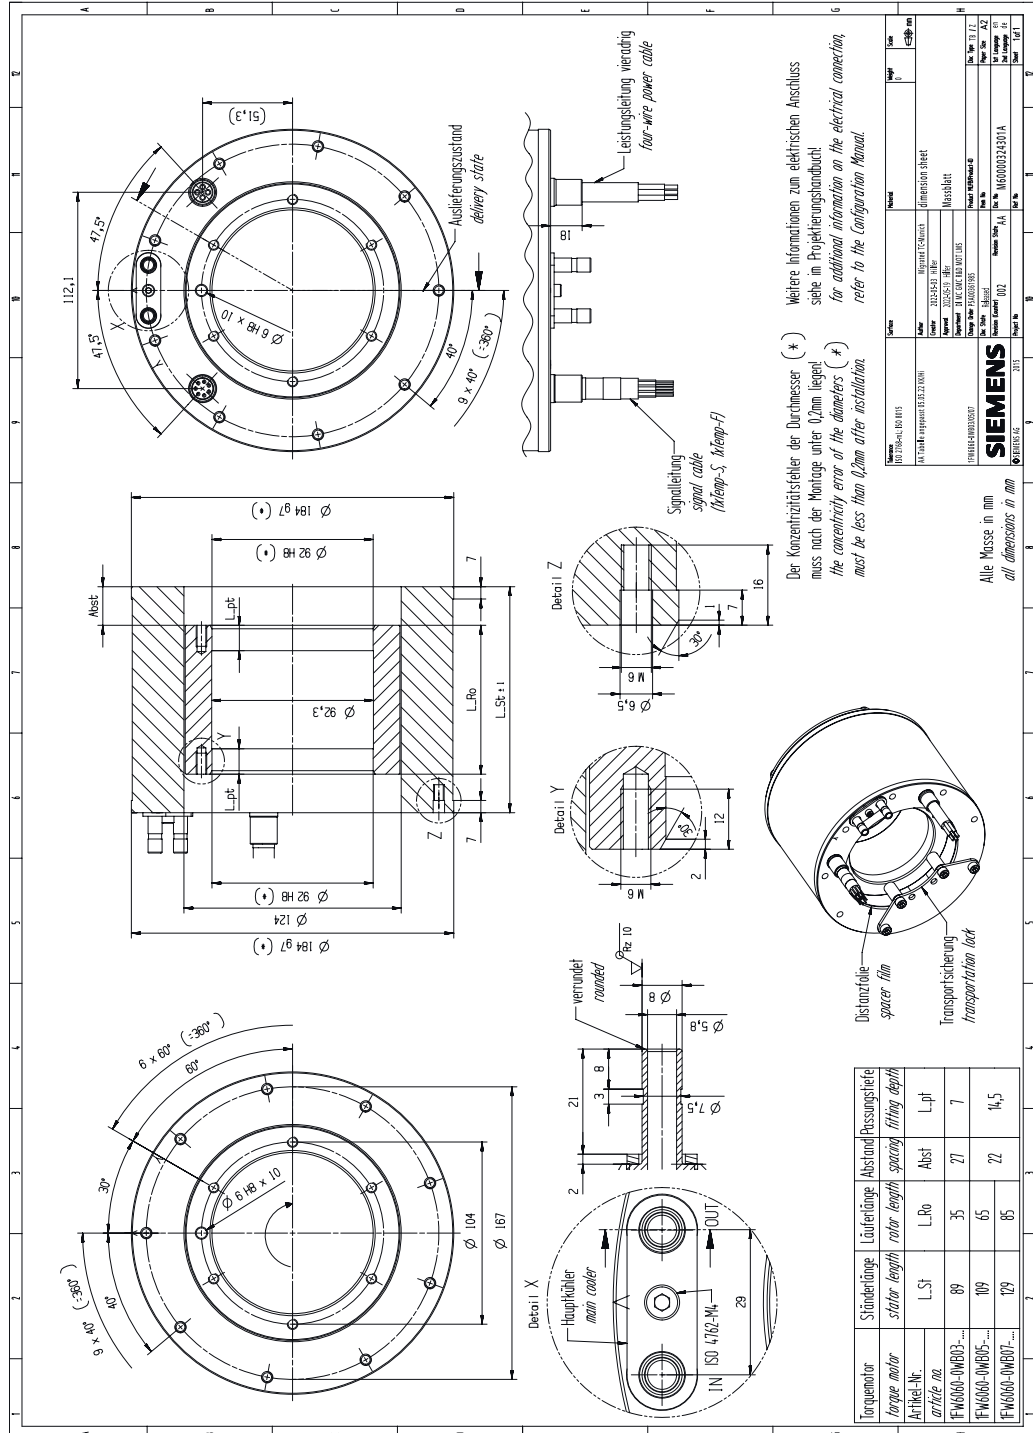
1FW6060-xxB (active part length 03, 05 and 07, axial electrical connection with sleeve)
